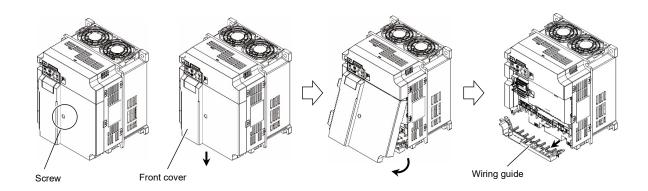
Removal of the front cover and the wiring guide (for FRN0069E3S-2G)
